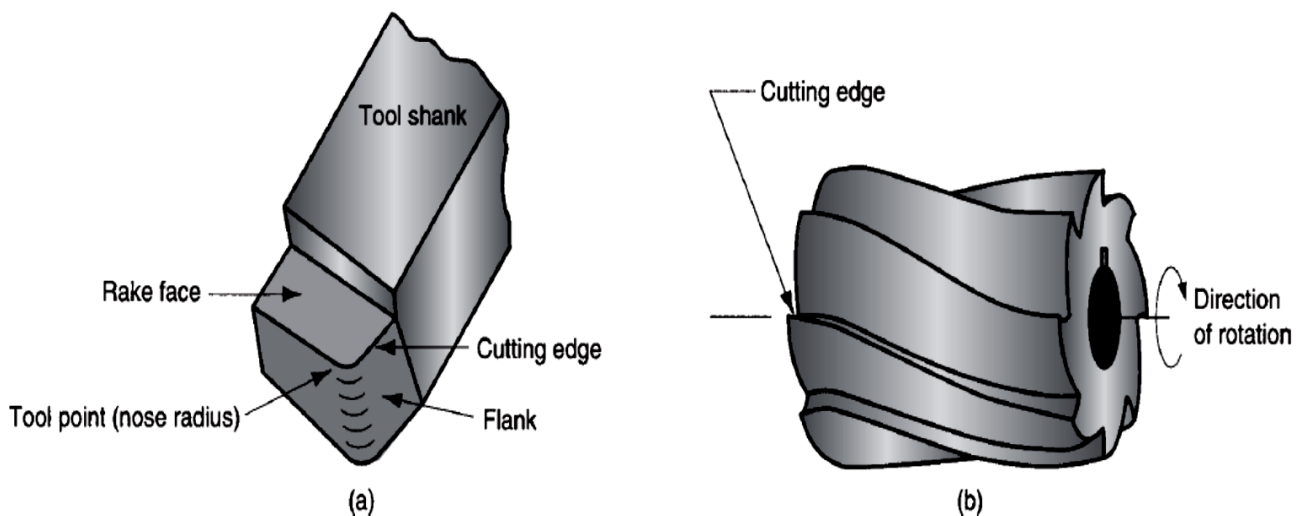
(a) a single-point tool, (b) a helical milling cutter (multiple cutting edge tool)
